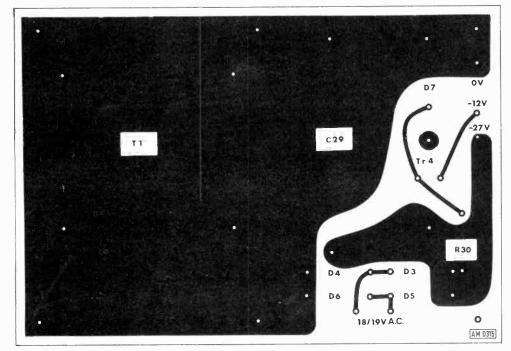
Actual size layout for the PCB on which the power supply is built.
